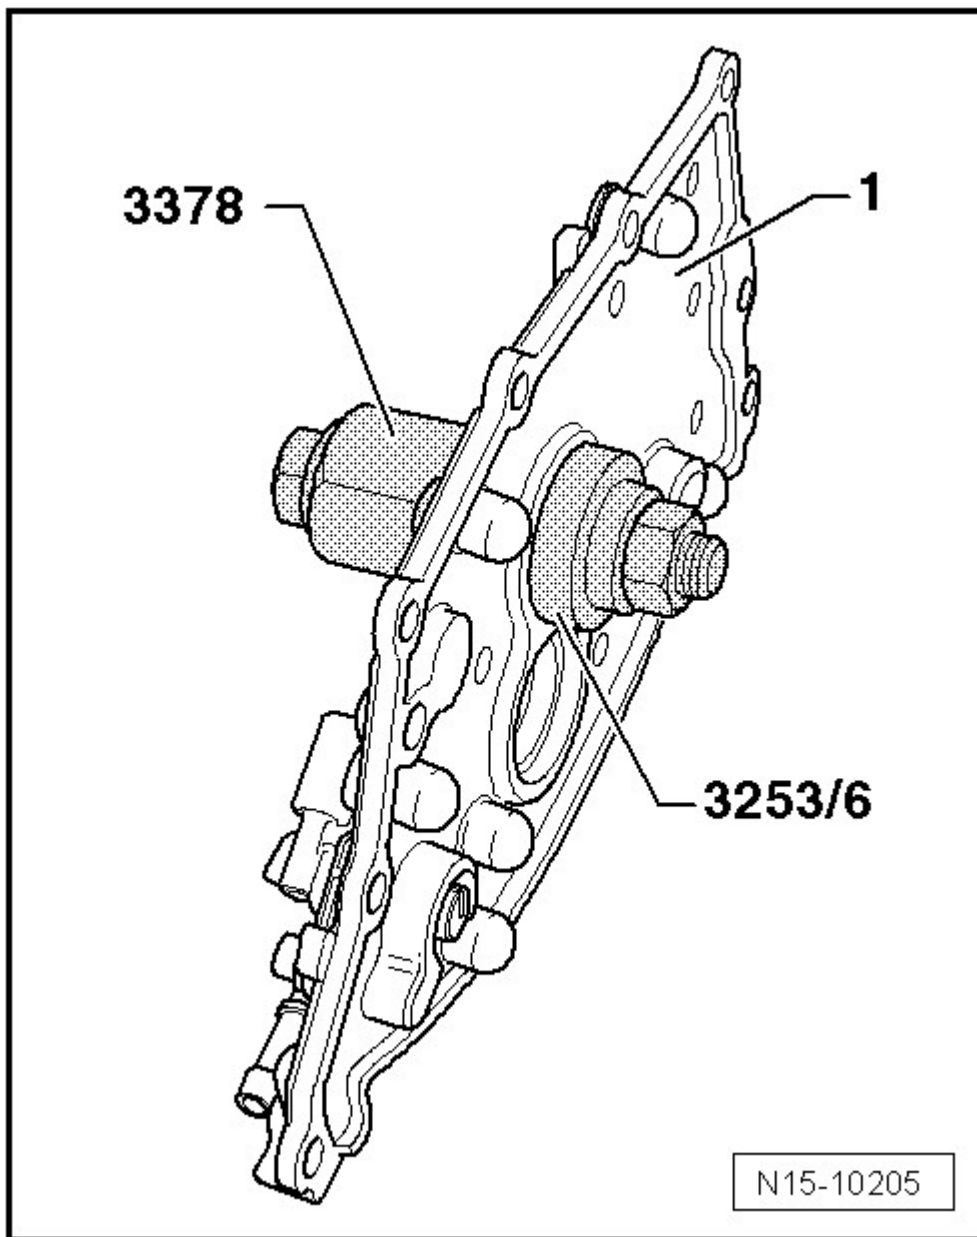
Identifying Seal Installer 3378 In Cover Piece -1- And Seal Installer 3253/6 From Assembly Tool
